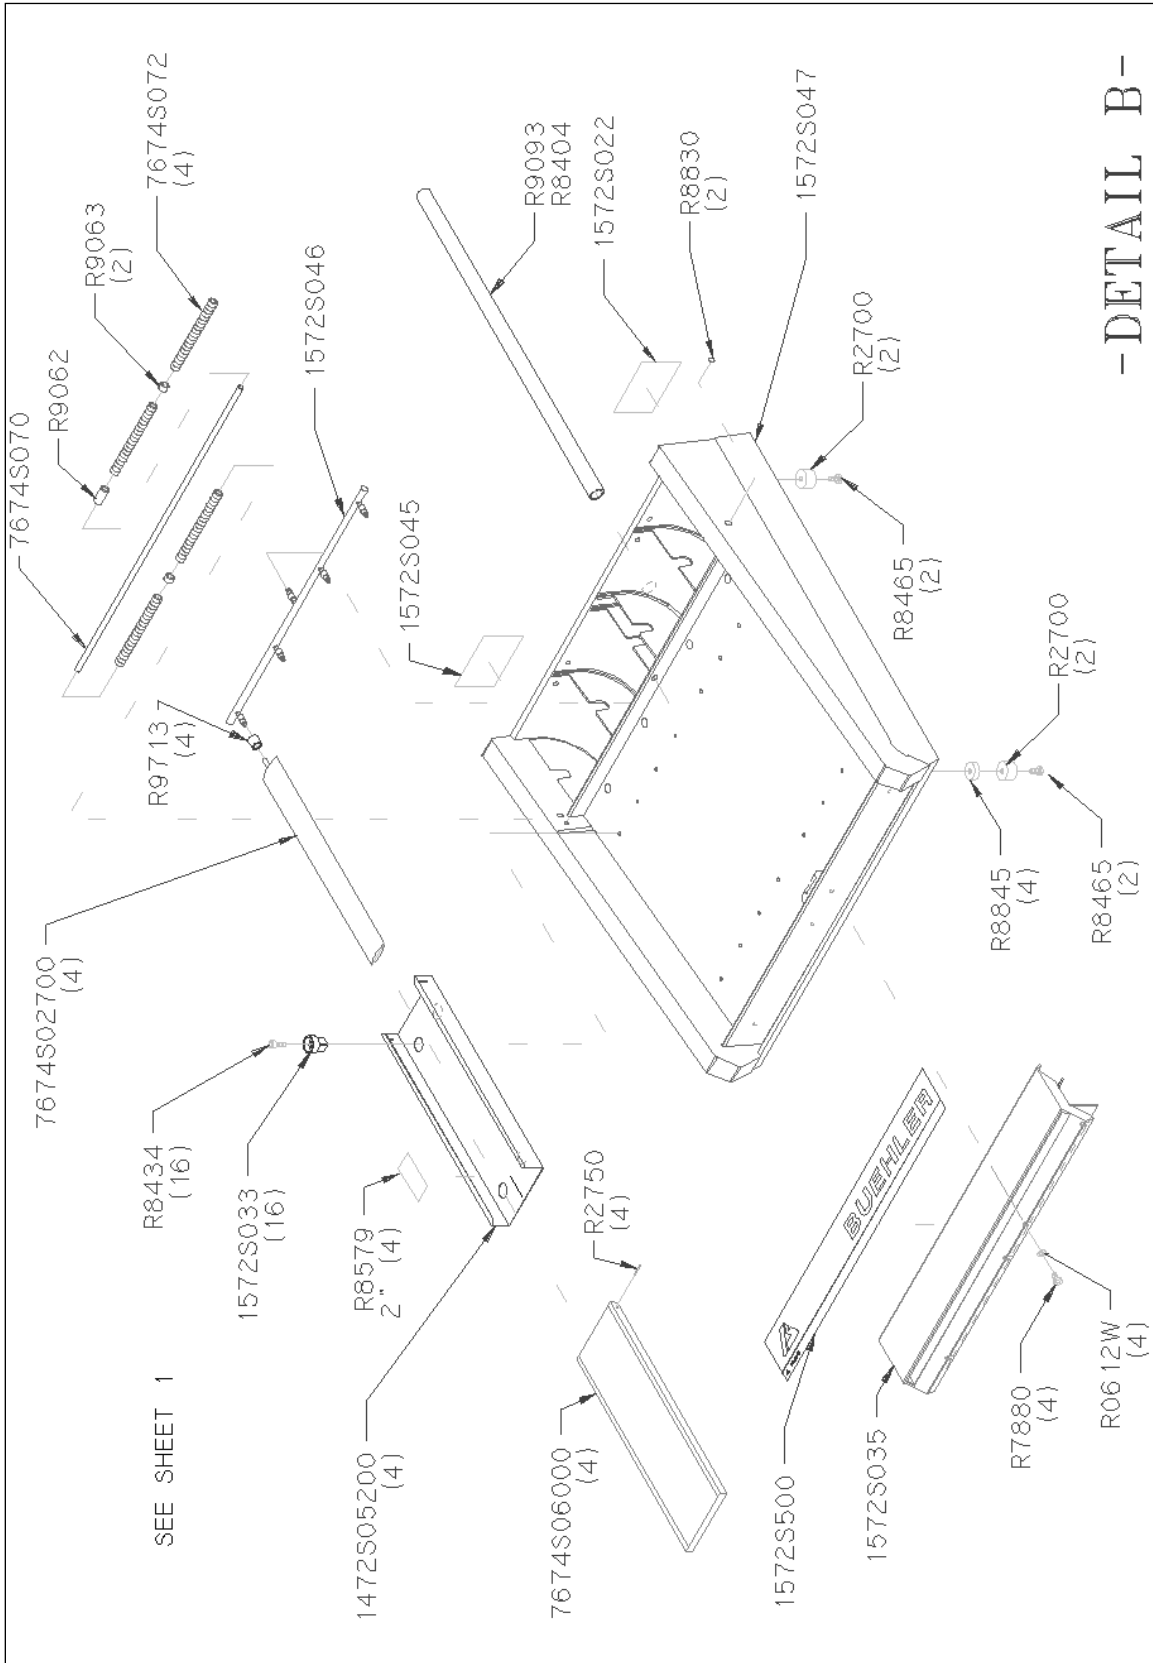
HandiMet 2 Assembly Diagram, Detail B (391572B)
